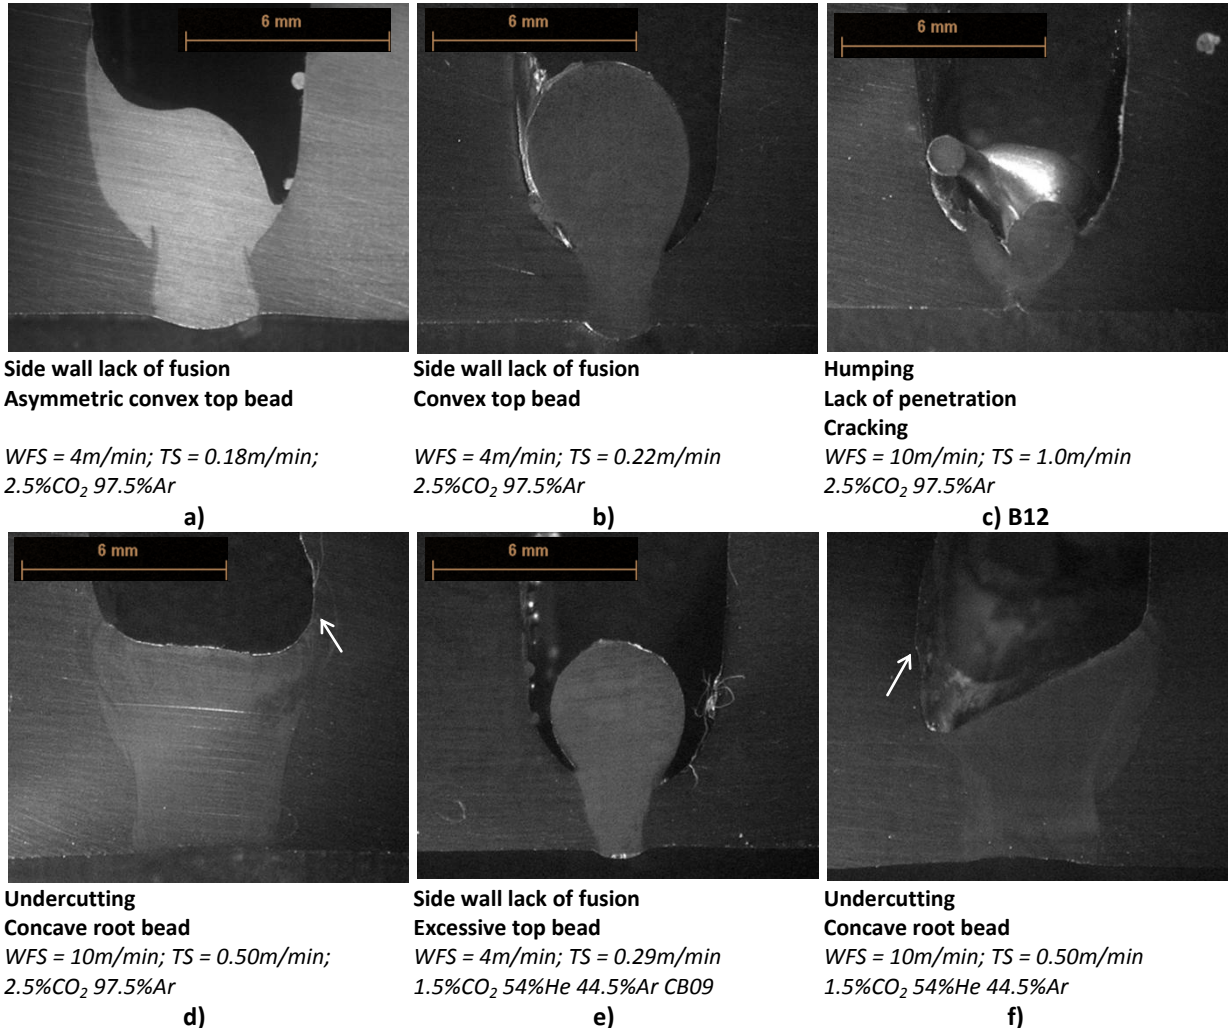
Macrostructures illustrating defects on welding of narrow groove pipe using CMT-P.
